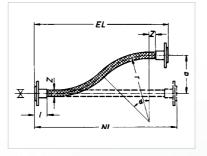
S-shaped hose assembly installation for static correction of a parallel pipe misalignment
